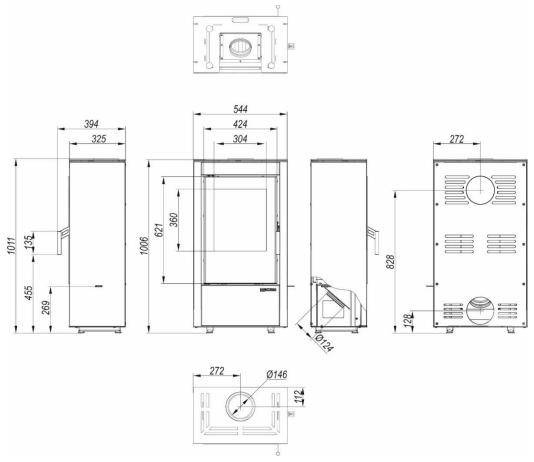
Dimensions (in mm) of the DEFRO HOME CERES TOP heating stove.
